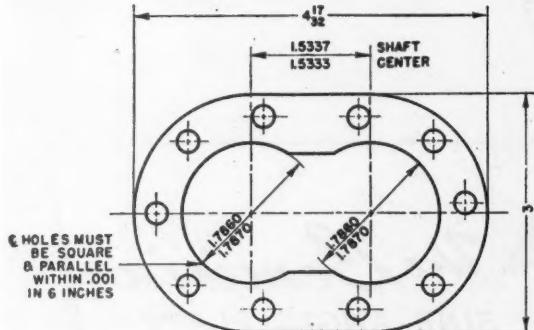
Drawing of Pump part in which two large holes are to be bored.
